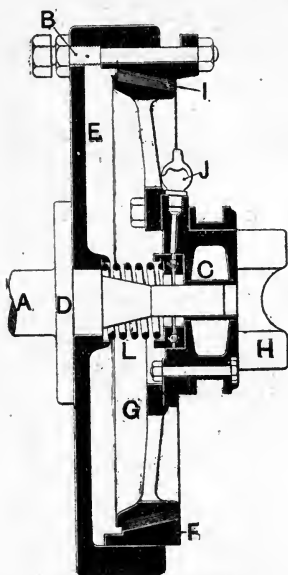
SECTION OF INTERNAL CLUTCH.
